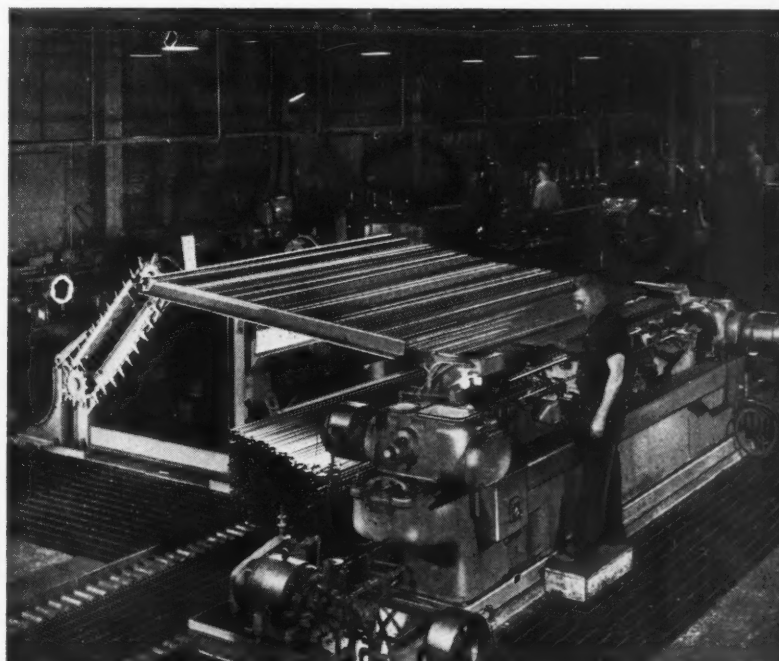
The electrical metallic tubing is sized to the required diameter and simultaneously straightened by the unit at the right. The tubing is cut into 10-foot lengths by the cut-off tool on the machine at the left
